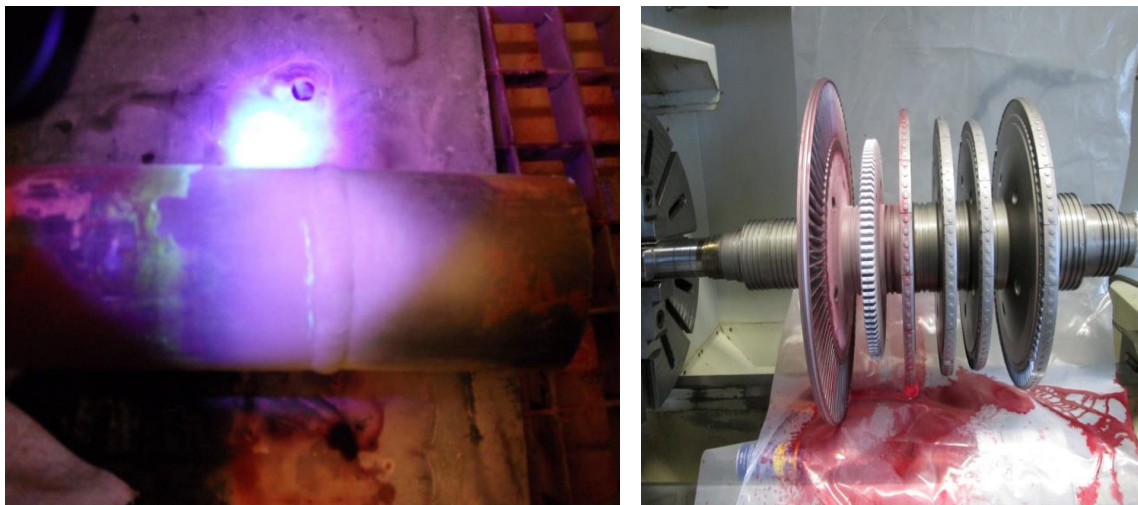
Left: Crack in austenitic HR3C boiler pipe in Heat Affected Zone (HAZ) of weld made visible using PT. Right: PT applied at rotor body of turbine.
